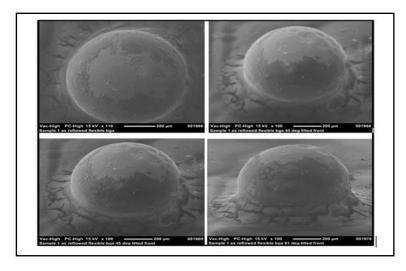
SEM images of the BGA solder joint test of the reflowed sample
